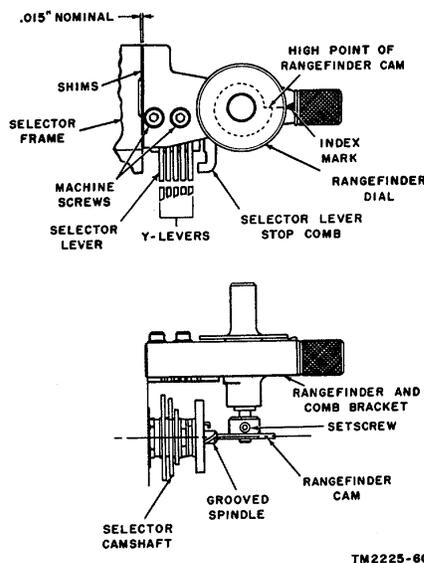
Rangefinder cam and selector lever stop comb adjustment (TT-76/GGC).
